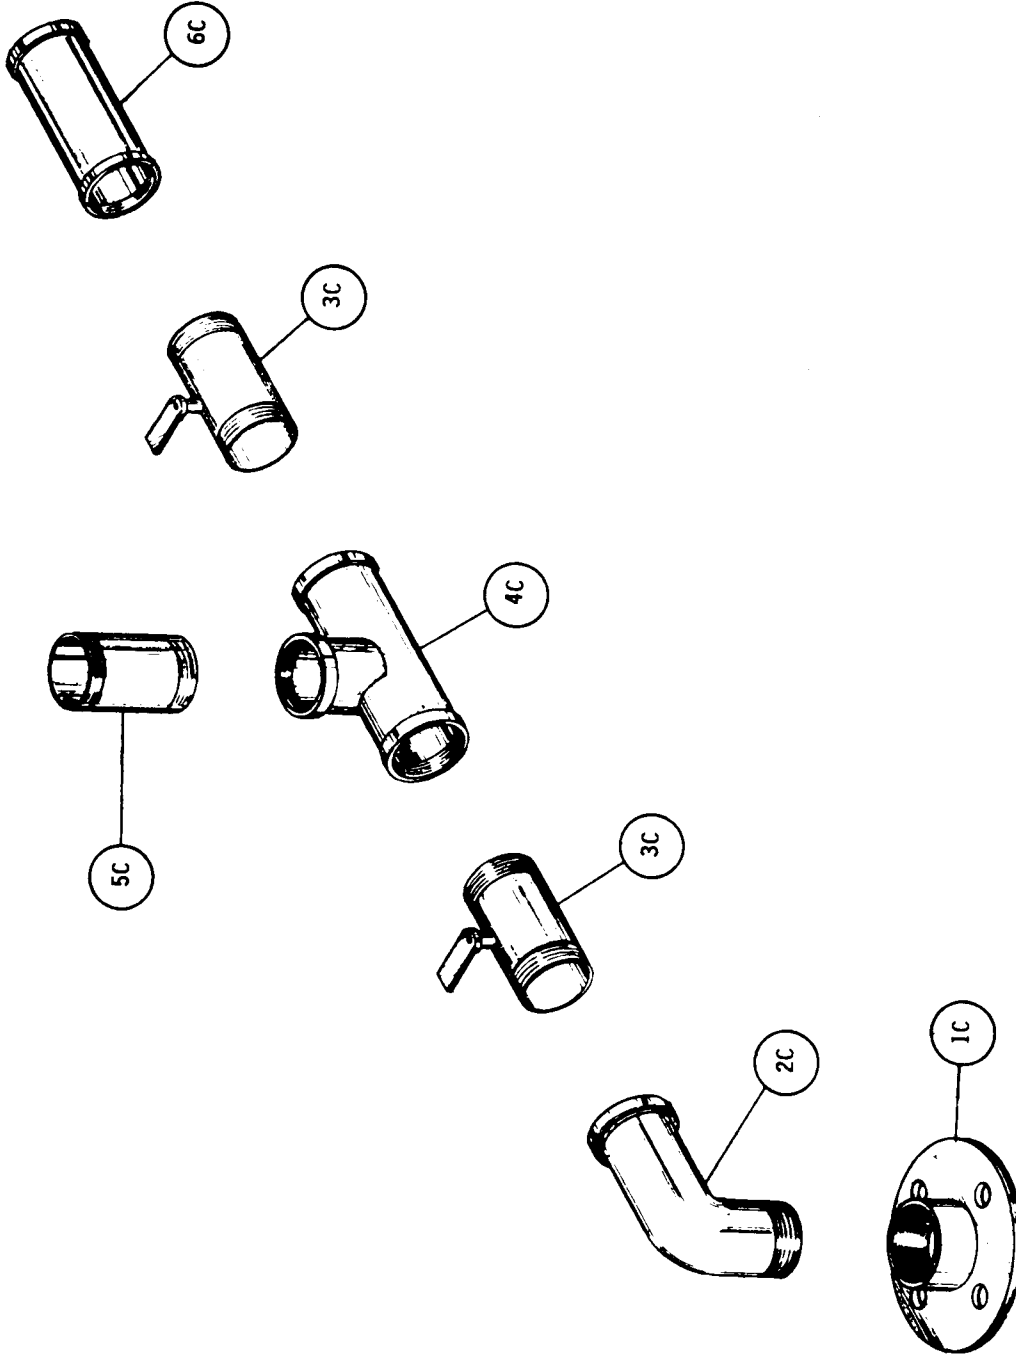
Exploded, schematic diagram of the carbureting unit and control valves.
